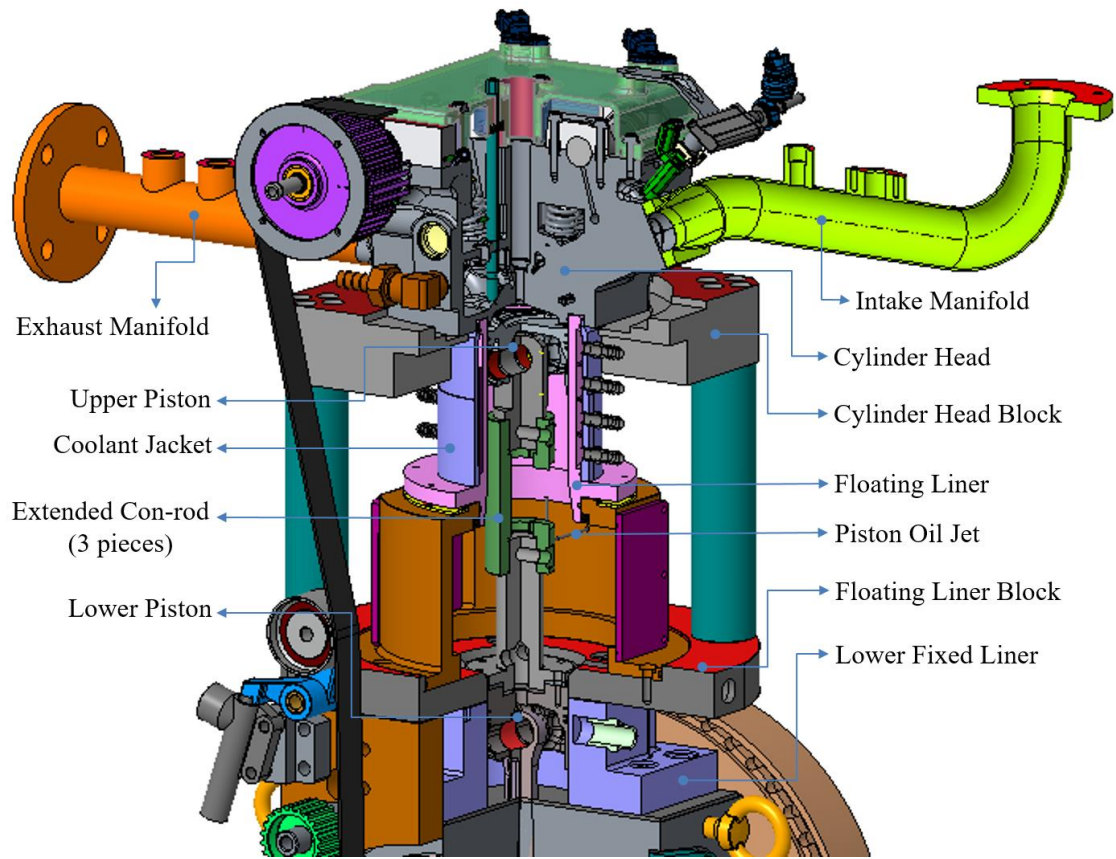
Detailed structure of Engine V2 – 90 ° engine front-intake cutting view
